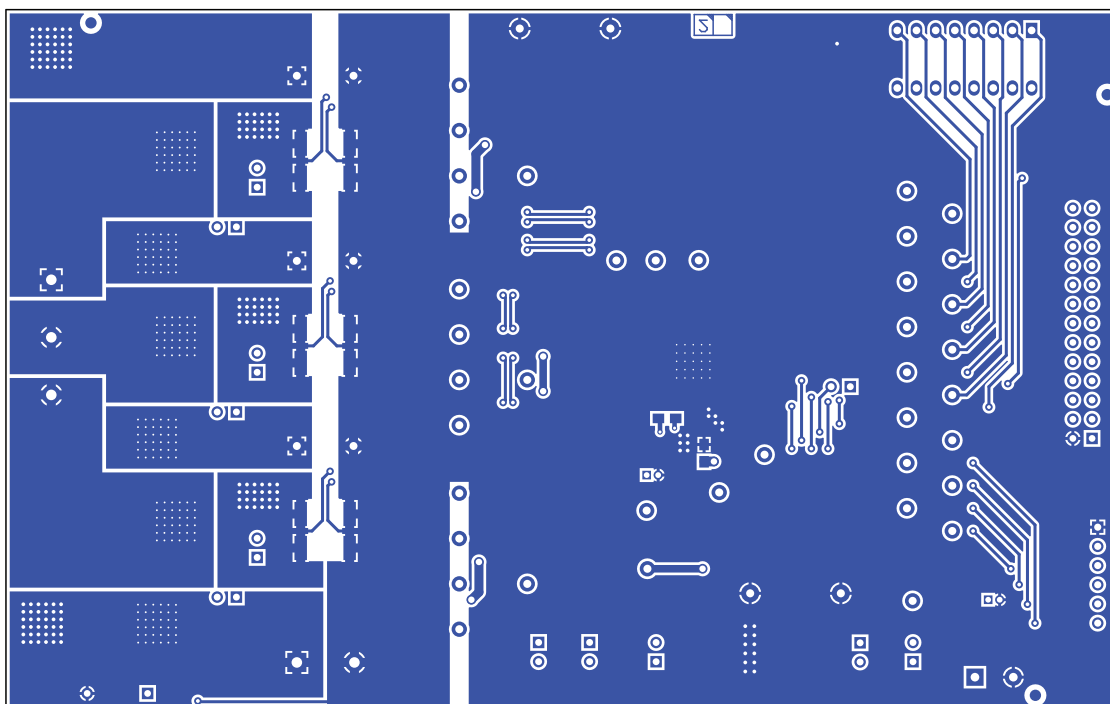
A89199KEV Evaluation Board PCB, Bottom Layer
